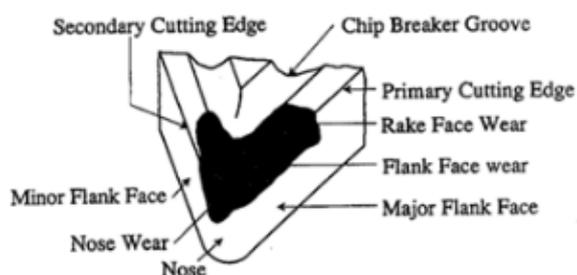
Wear zones on the cutting tool caused by chip formation [3]
